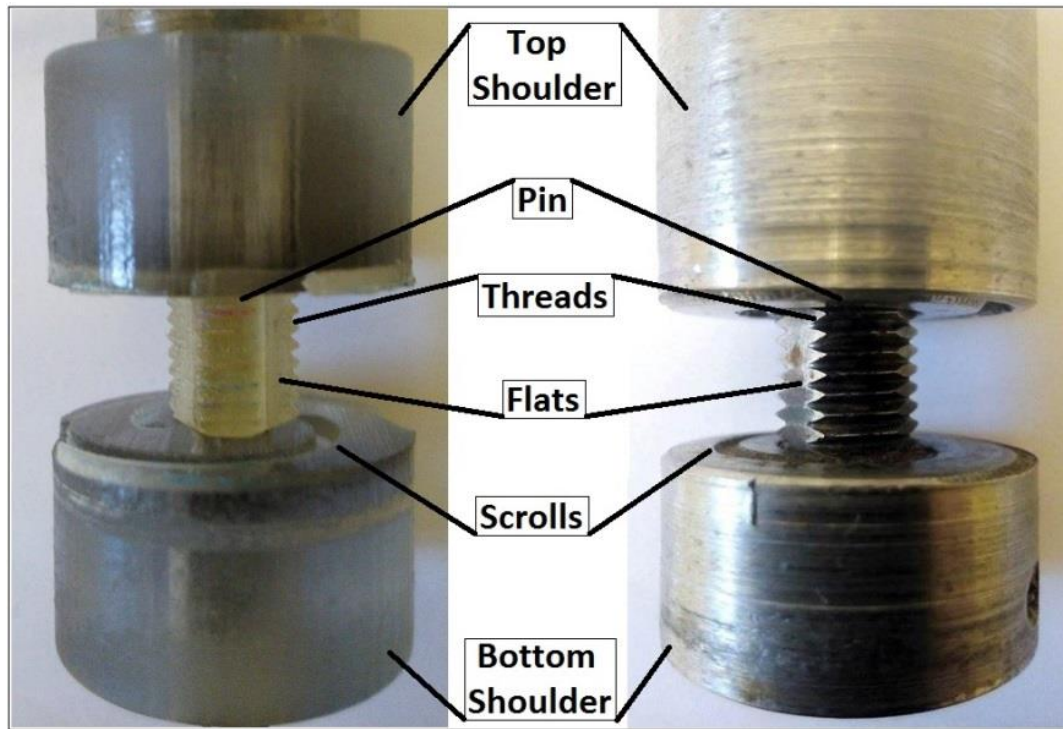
The apparent geometry features of the bobbin tools used for the analogue and aluminium welds; (a) 3D-printed plastic tool utilised for the plasticine analogue, (b) H13 steel tool for the aluminium welding.
